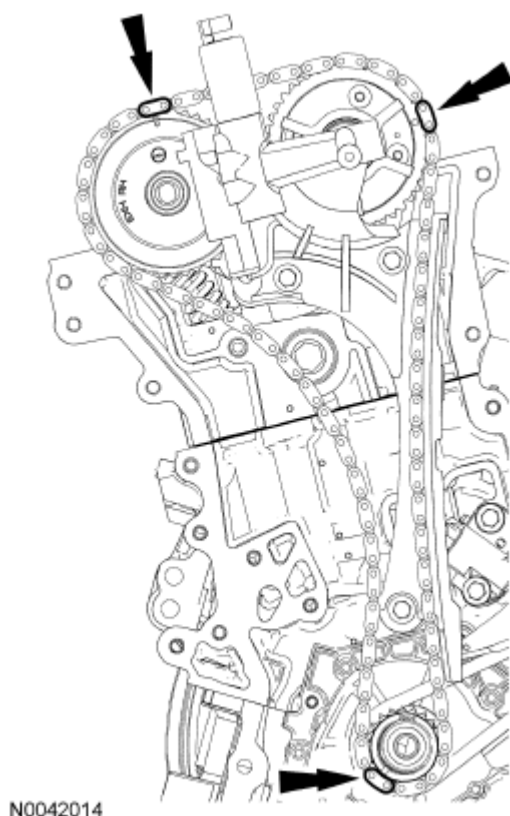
Aligning Marks On Timing Chain With Marks On Camshaft And Crankshaft Sprockets
